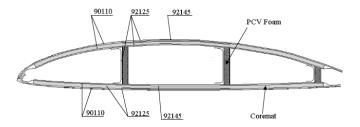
Wing cross section with Interglas-symbols of used fabrics
